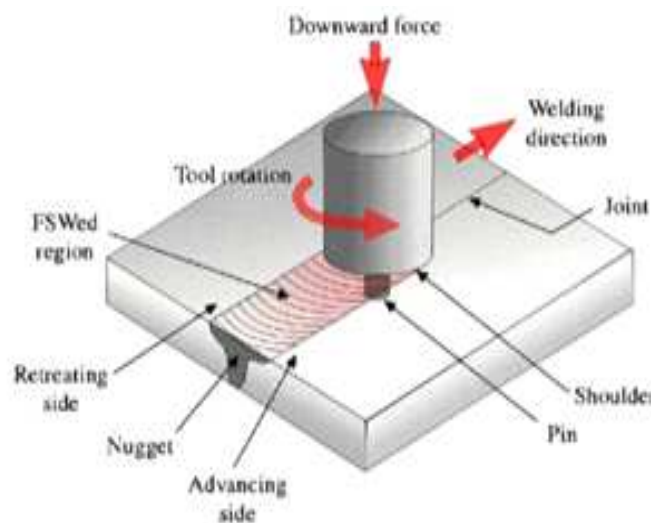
Schematic Diagram of Friction Stir Welding
